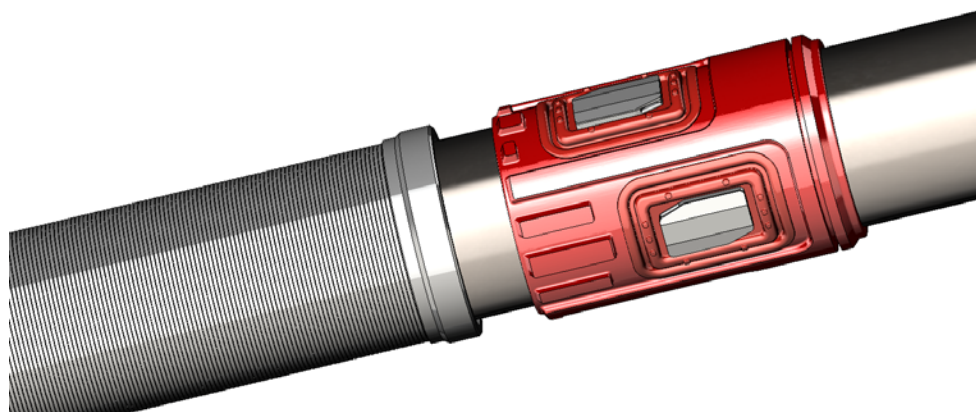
AICD installed on a base pipe with a screen section (cover sleeve removed)
